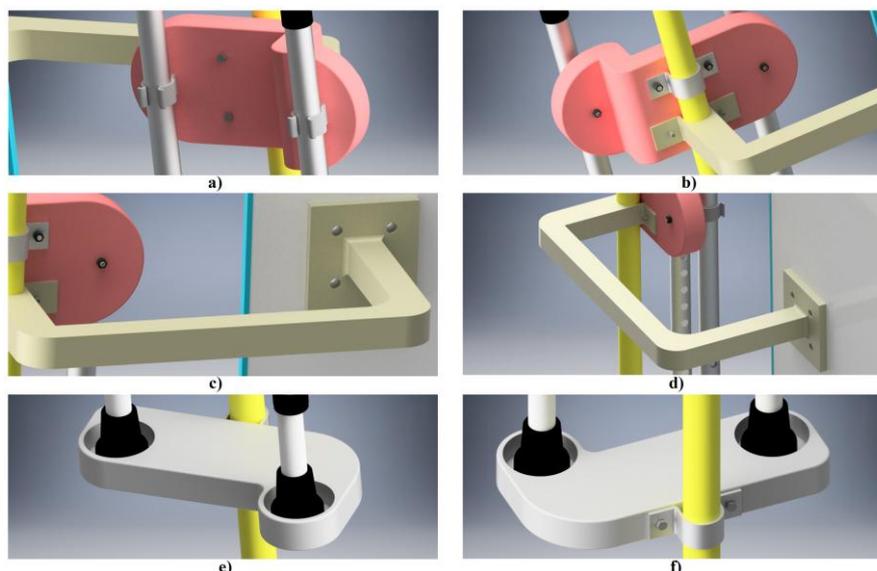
Project modeling. a) Mounting the fixation; b) Assembly of the posterior fixation; c) Mounting the support fixing support; d) Mounting the support fixing support, rear part.
